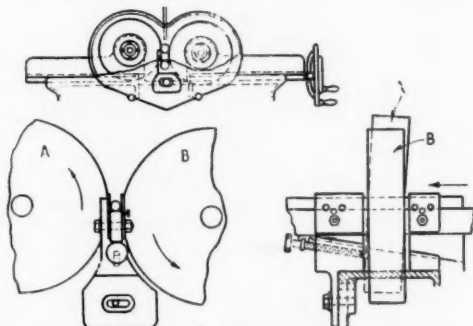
A machine with grinding and governing wheels at a fixed angle.
